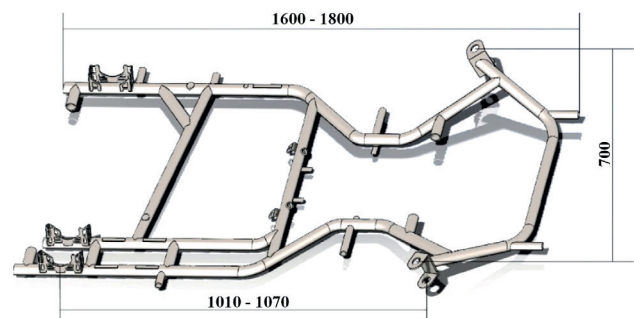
Three-Dimensional Model of the Chassis Prototype.
